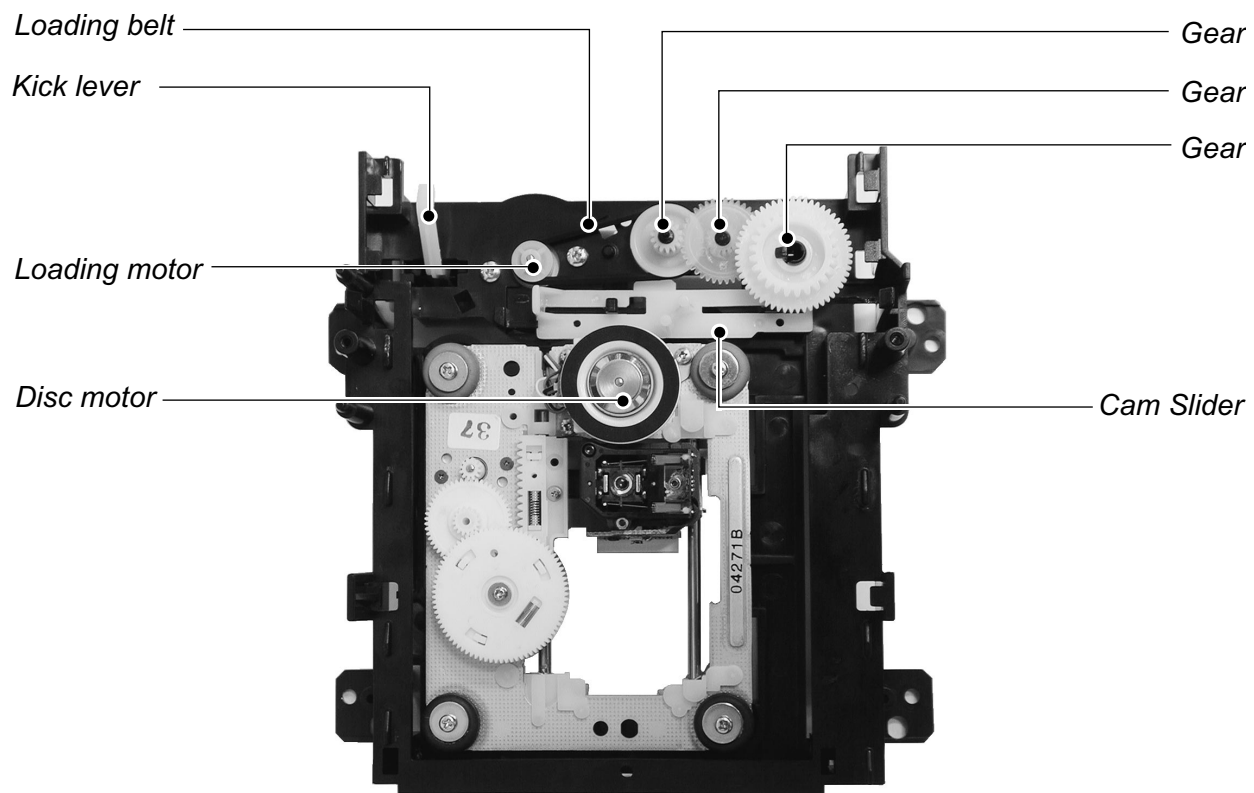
Mechanism chassis assembly (Internal side)
